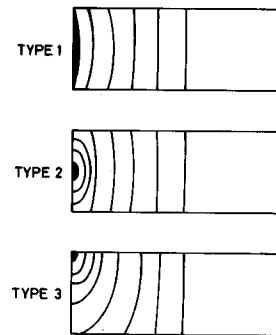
Three Modes of Fatigue Crack Shape.
